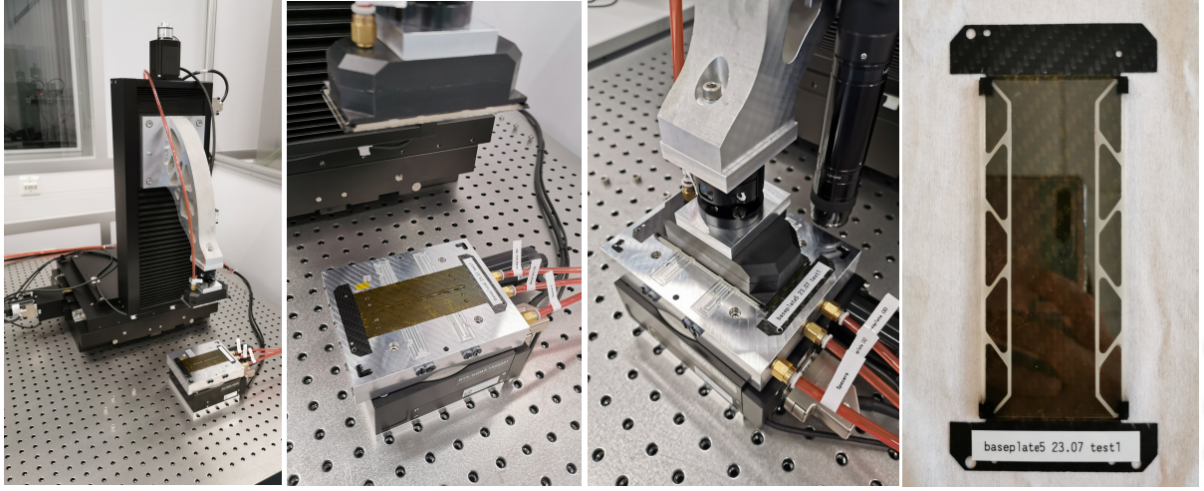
The procedure of gluing baseplate to sensors-sandwich. From left: the assembly robot; kapton+baseplate with the glue on top; gluing the parts together; assembled PS Module.
